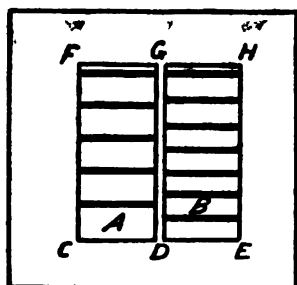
Test for parallelism of gage surfaces. B shorter at GH than DE
